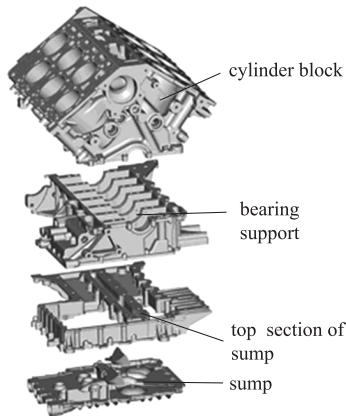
Audi A8 6.0 W12 Engine
